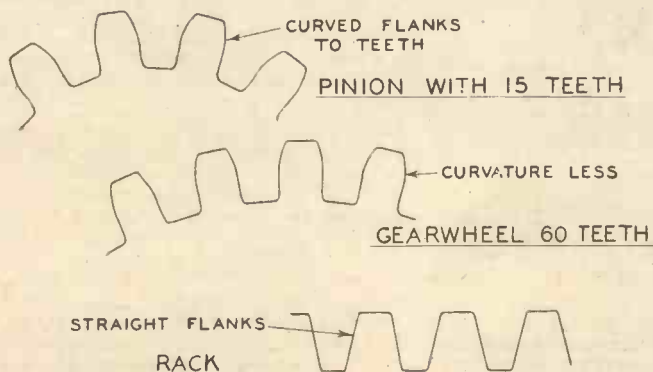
With the involute form of gear tooth, principally used, the flanks of the teeth become less curved as the size of the gear wheel increases, until they are straight in the case of a rack, or toothed strip
